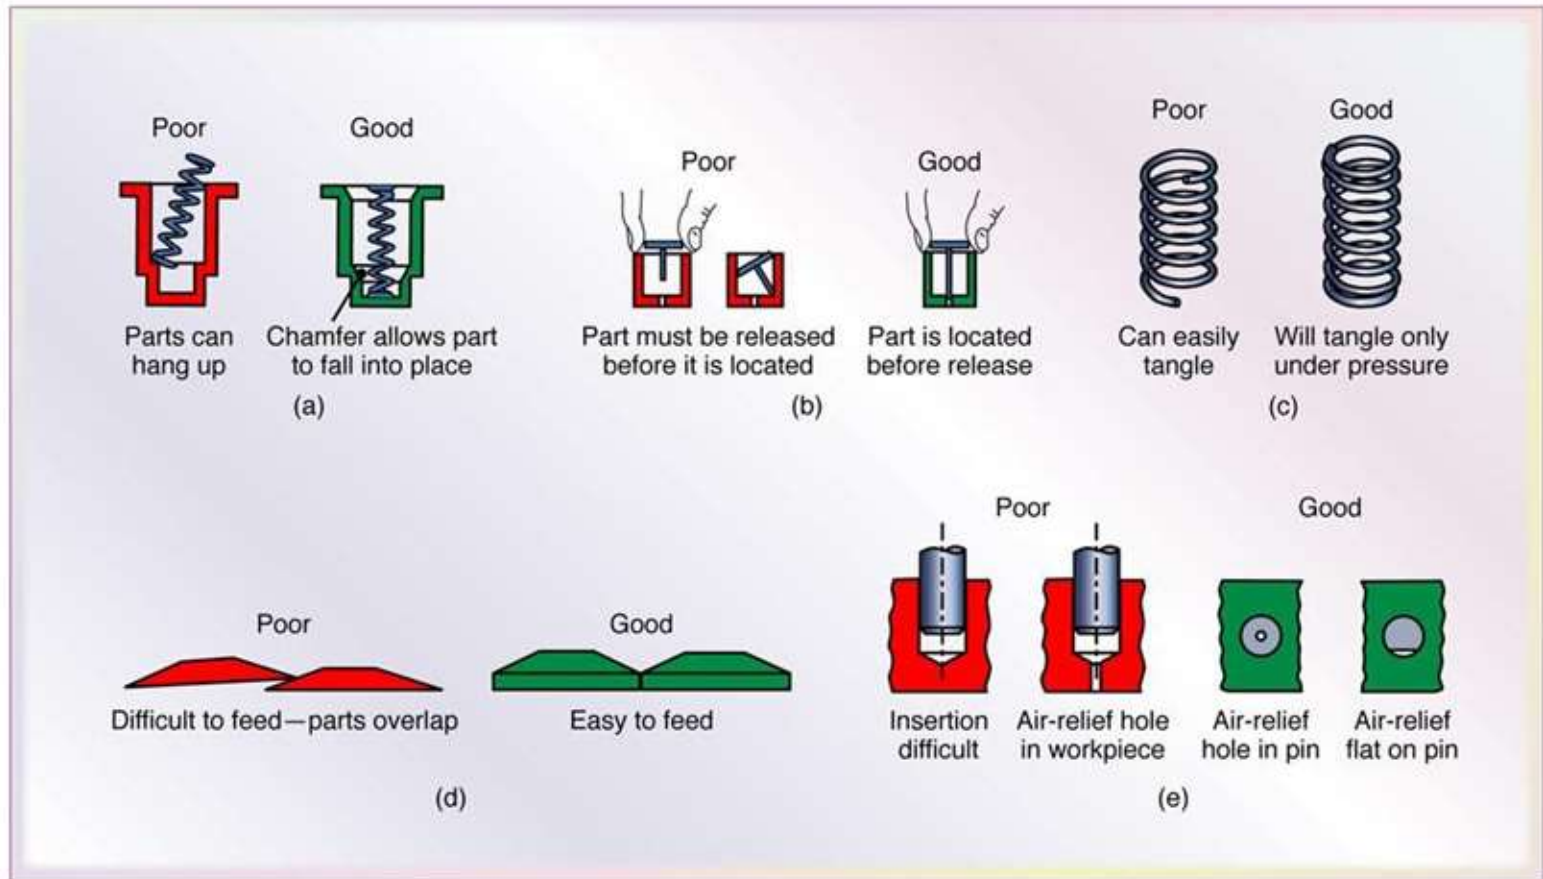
Redesign of parts to facilitate assembly. *Source:* Reprinted from G. Boothroyd and P. Dewhurst, *Product Design for Assembly*, 1989. Courtesy of Marcel Dekker, Inc.
